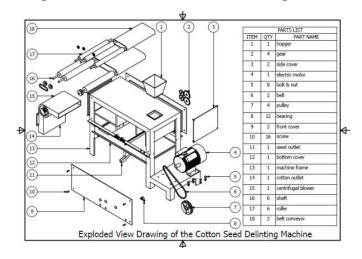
Exploded view and Part name of the cotton seed delinting machine
